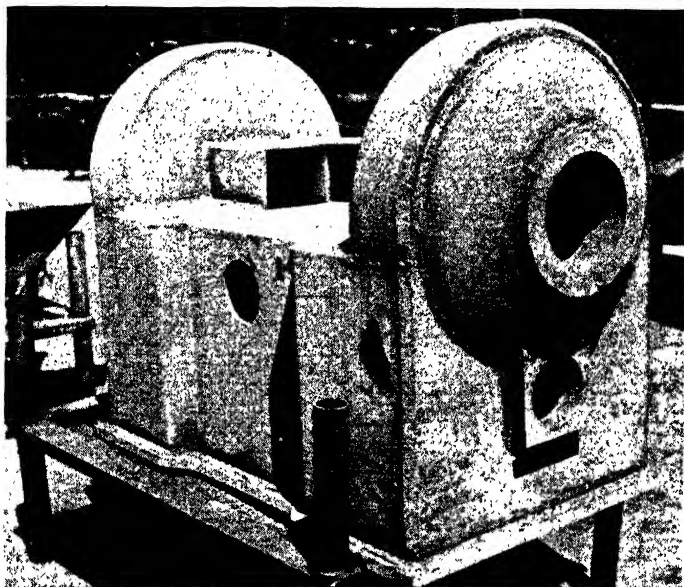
This transmission case with its complex shape, numerous welds, scale from normalizing, and the oil it will pick up during machining presents a more varied cleaning problem than a simple welding. (*Courtesy of R. G. LeTourneau, Inc.*)
